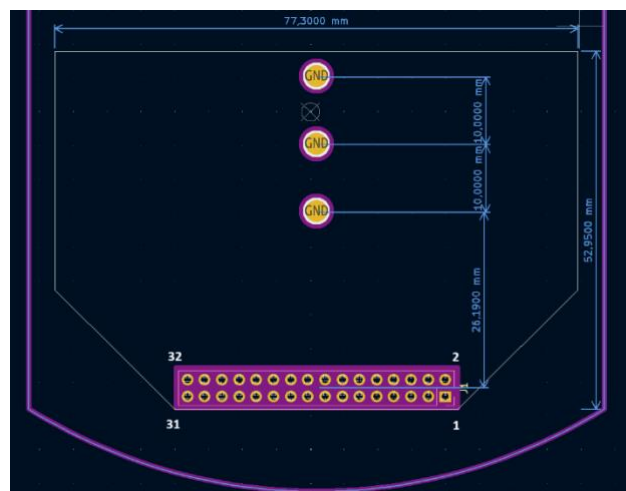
MM Power PCB pinouts that plug onto the MM Motherboard PCB (Example shape).
